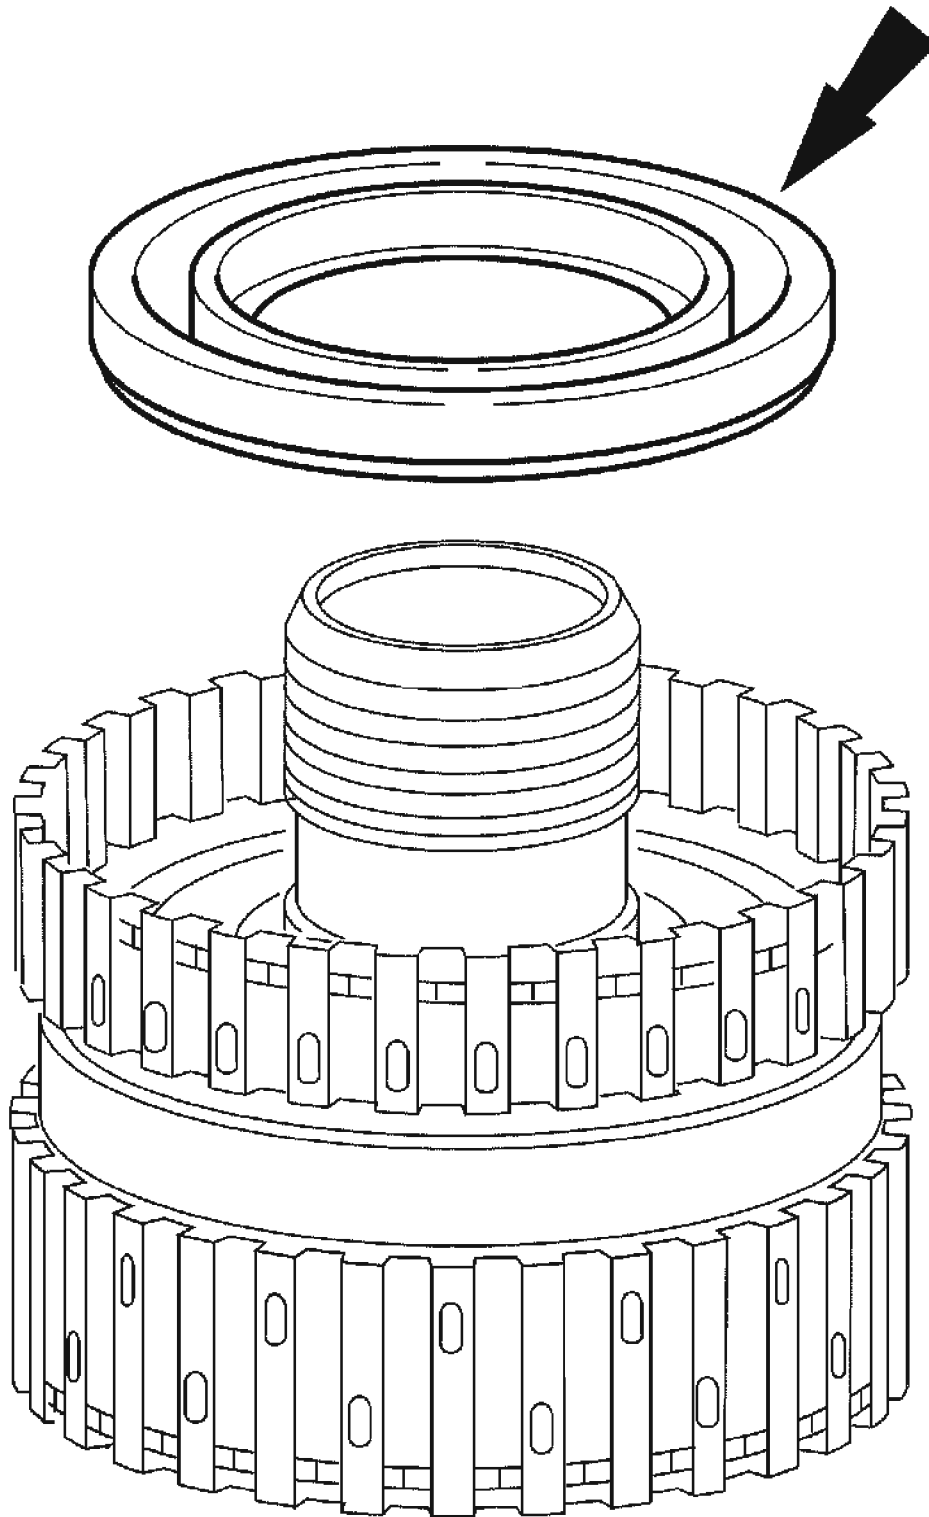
Installing Direct Clutch Piston Outer Seal On Direct Clutch Piston Assembly
